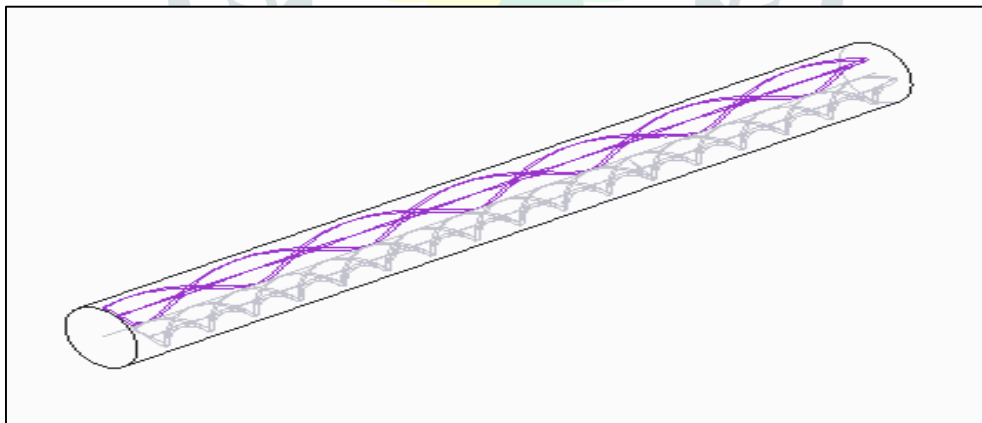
Wireframe CAD model of heat exchanger using twisted tapes (Y_0/Y 2.5)
